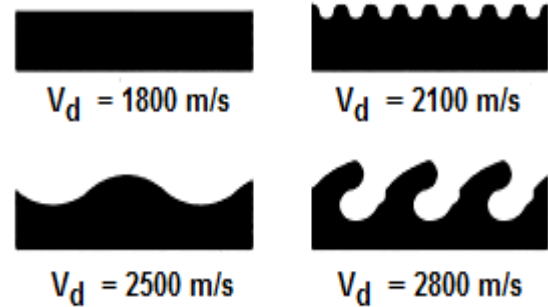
Explosive Welding Wave Morphology Variation [5]
